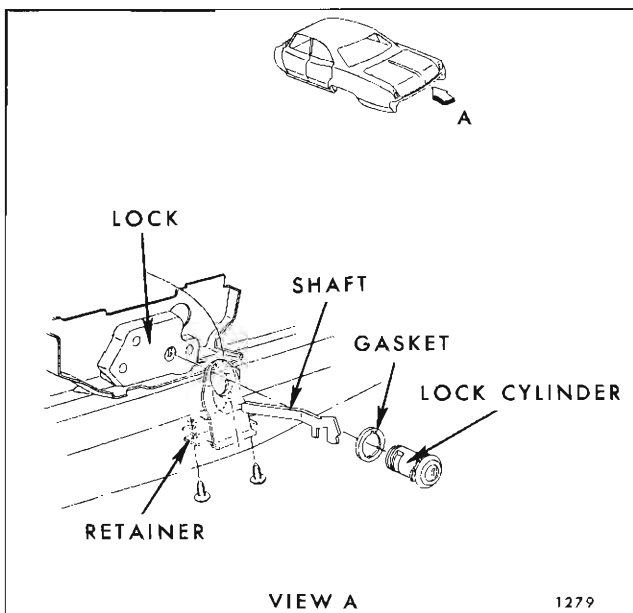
F10—Rear Compartment Lid Lock Cylinder Assembly
